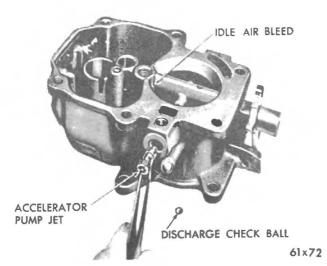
Removing or Installing Accelerator Pump Jet.
